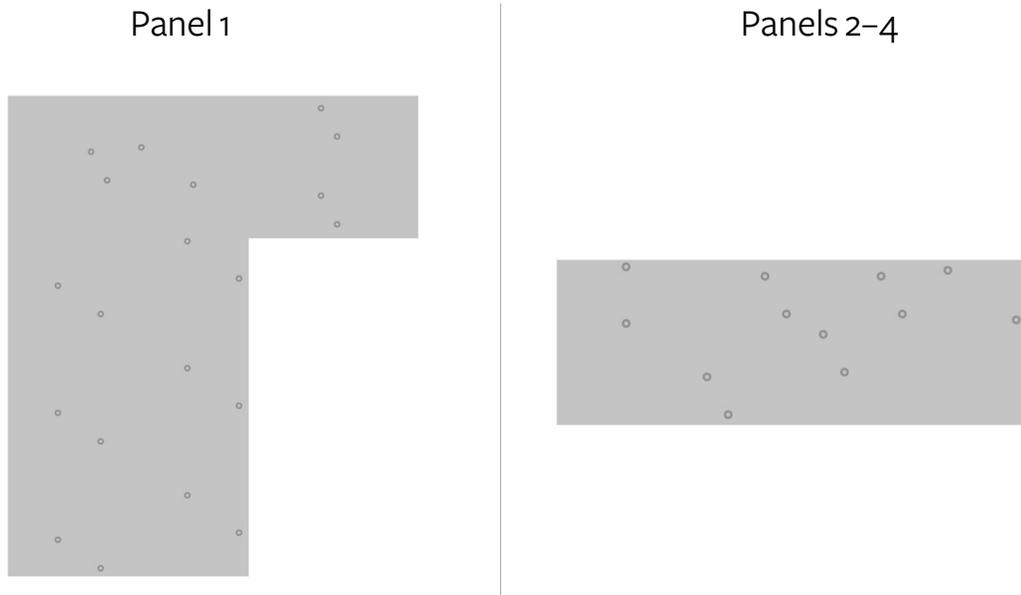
AutoCAD model of location of holes on panels for mounting blocks
